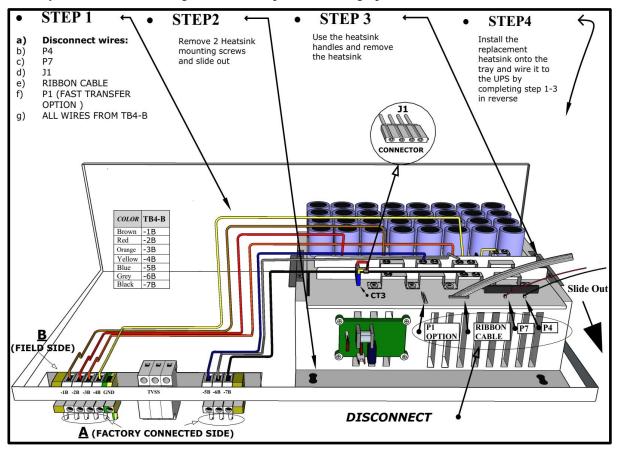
Heat sink assembly (50KVA ~ 50KW)
